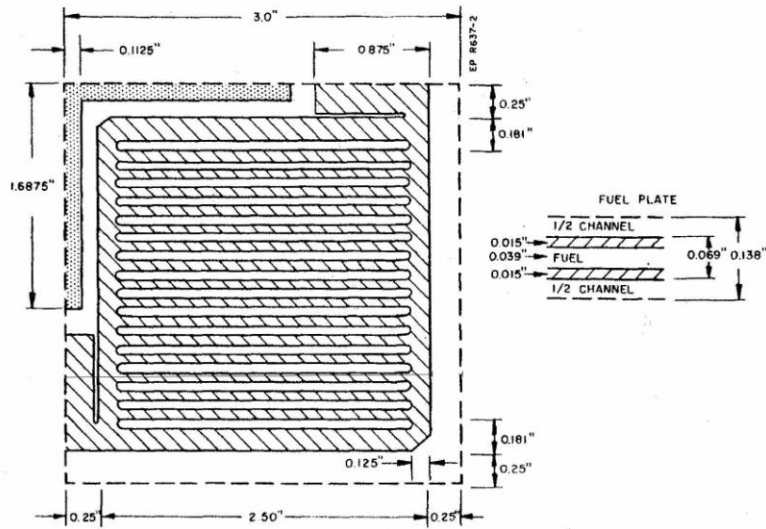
Shippingport Reactor PWR-1 seed subassembly showing the highly enriched zirconium clad fuel and coolant channels. Dimensions in inches.
